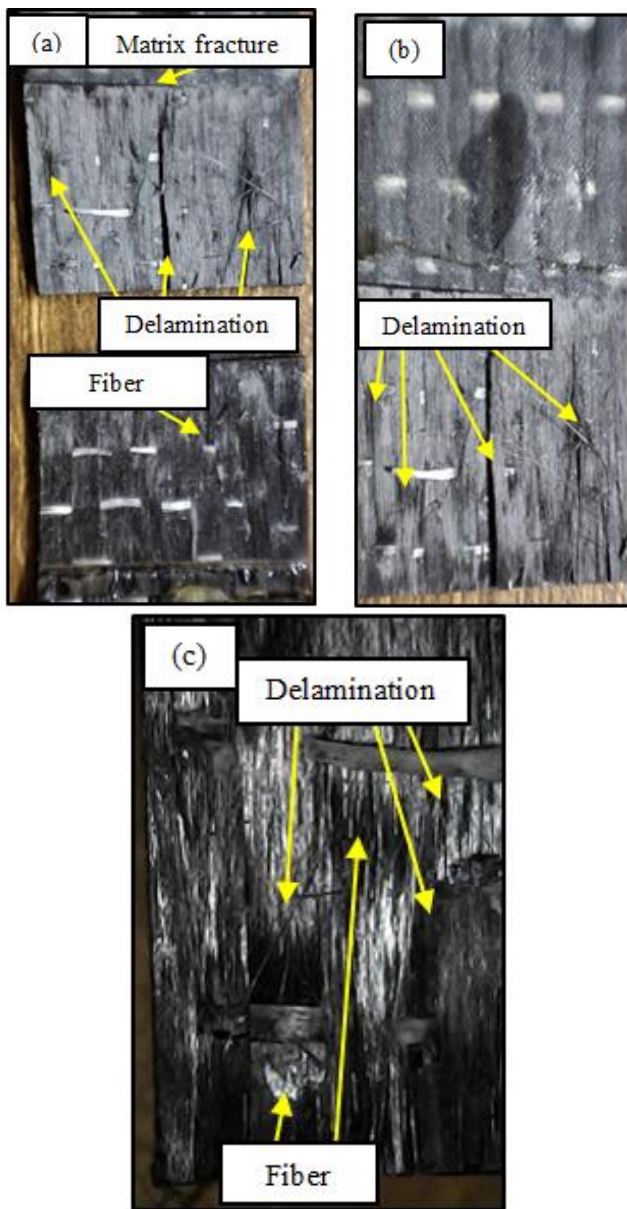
Fracture images of the joggle joint type: (a) both sides of the joint fracture, (b) the fracture and non-fracture areas of the joint, (c) magnified image of the joint fracture.
